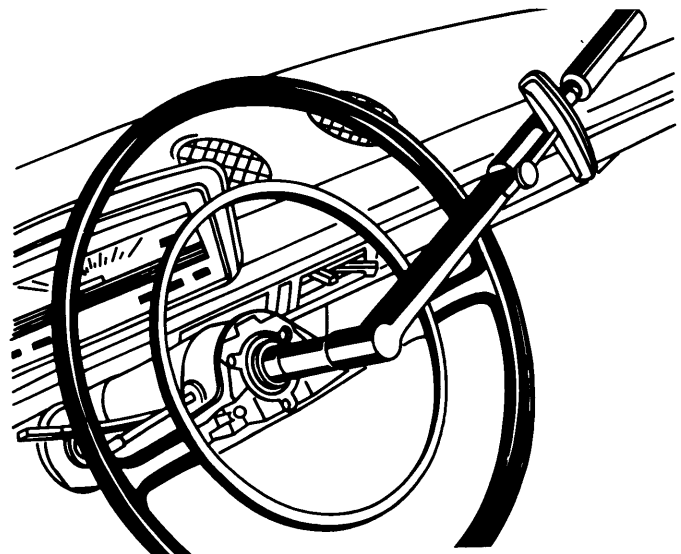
Using a Torque Wrench To Tighten Steering Wheel Nut
